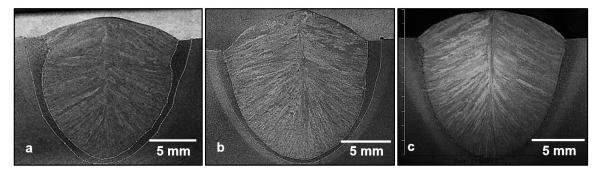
Macrographs of welded samples: (a) TS, (b) CW1 and (c) CW3.
